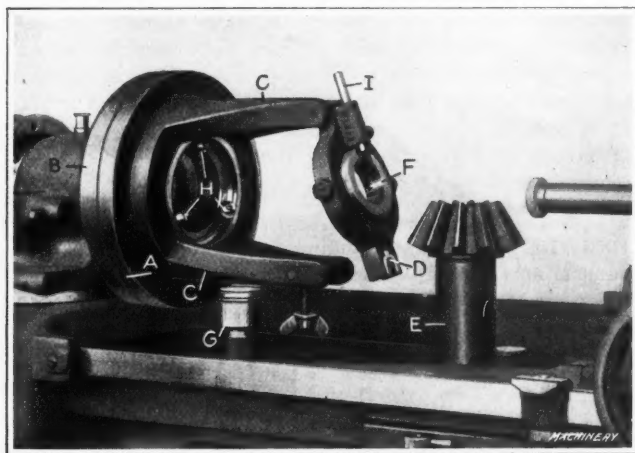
Chuck for holding Long Shank Bevel Gear for grinding
